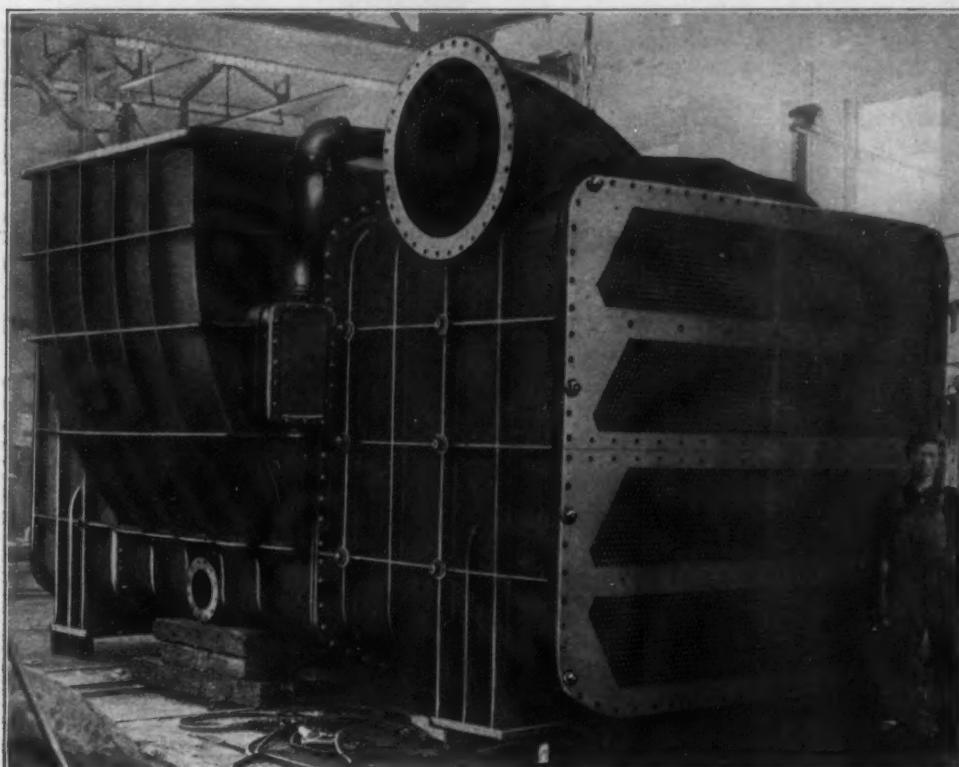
A Large Surface Condenser Built by the Wheeler Condenser & Engineering Company, Carteret, N. J.
